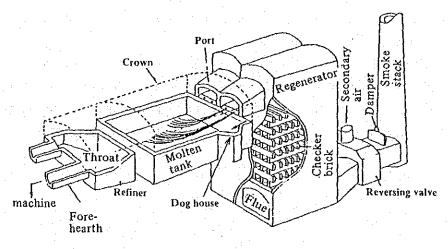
Outline sketch for middle-size tank furnace (End Port type)
